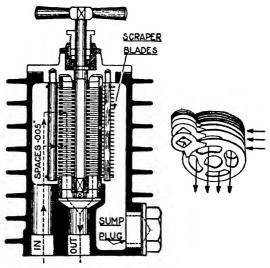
AUTO-KLEAN ROTATABLE DISK FILTER
